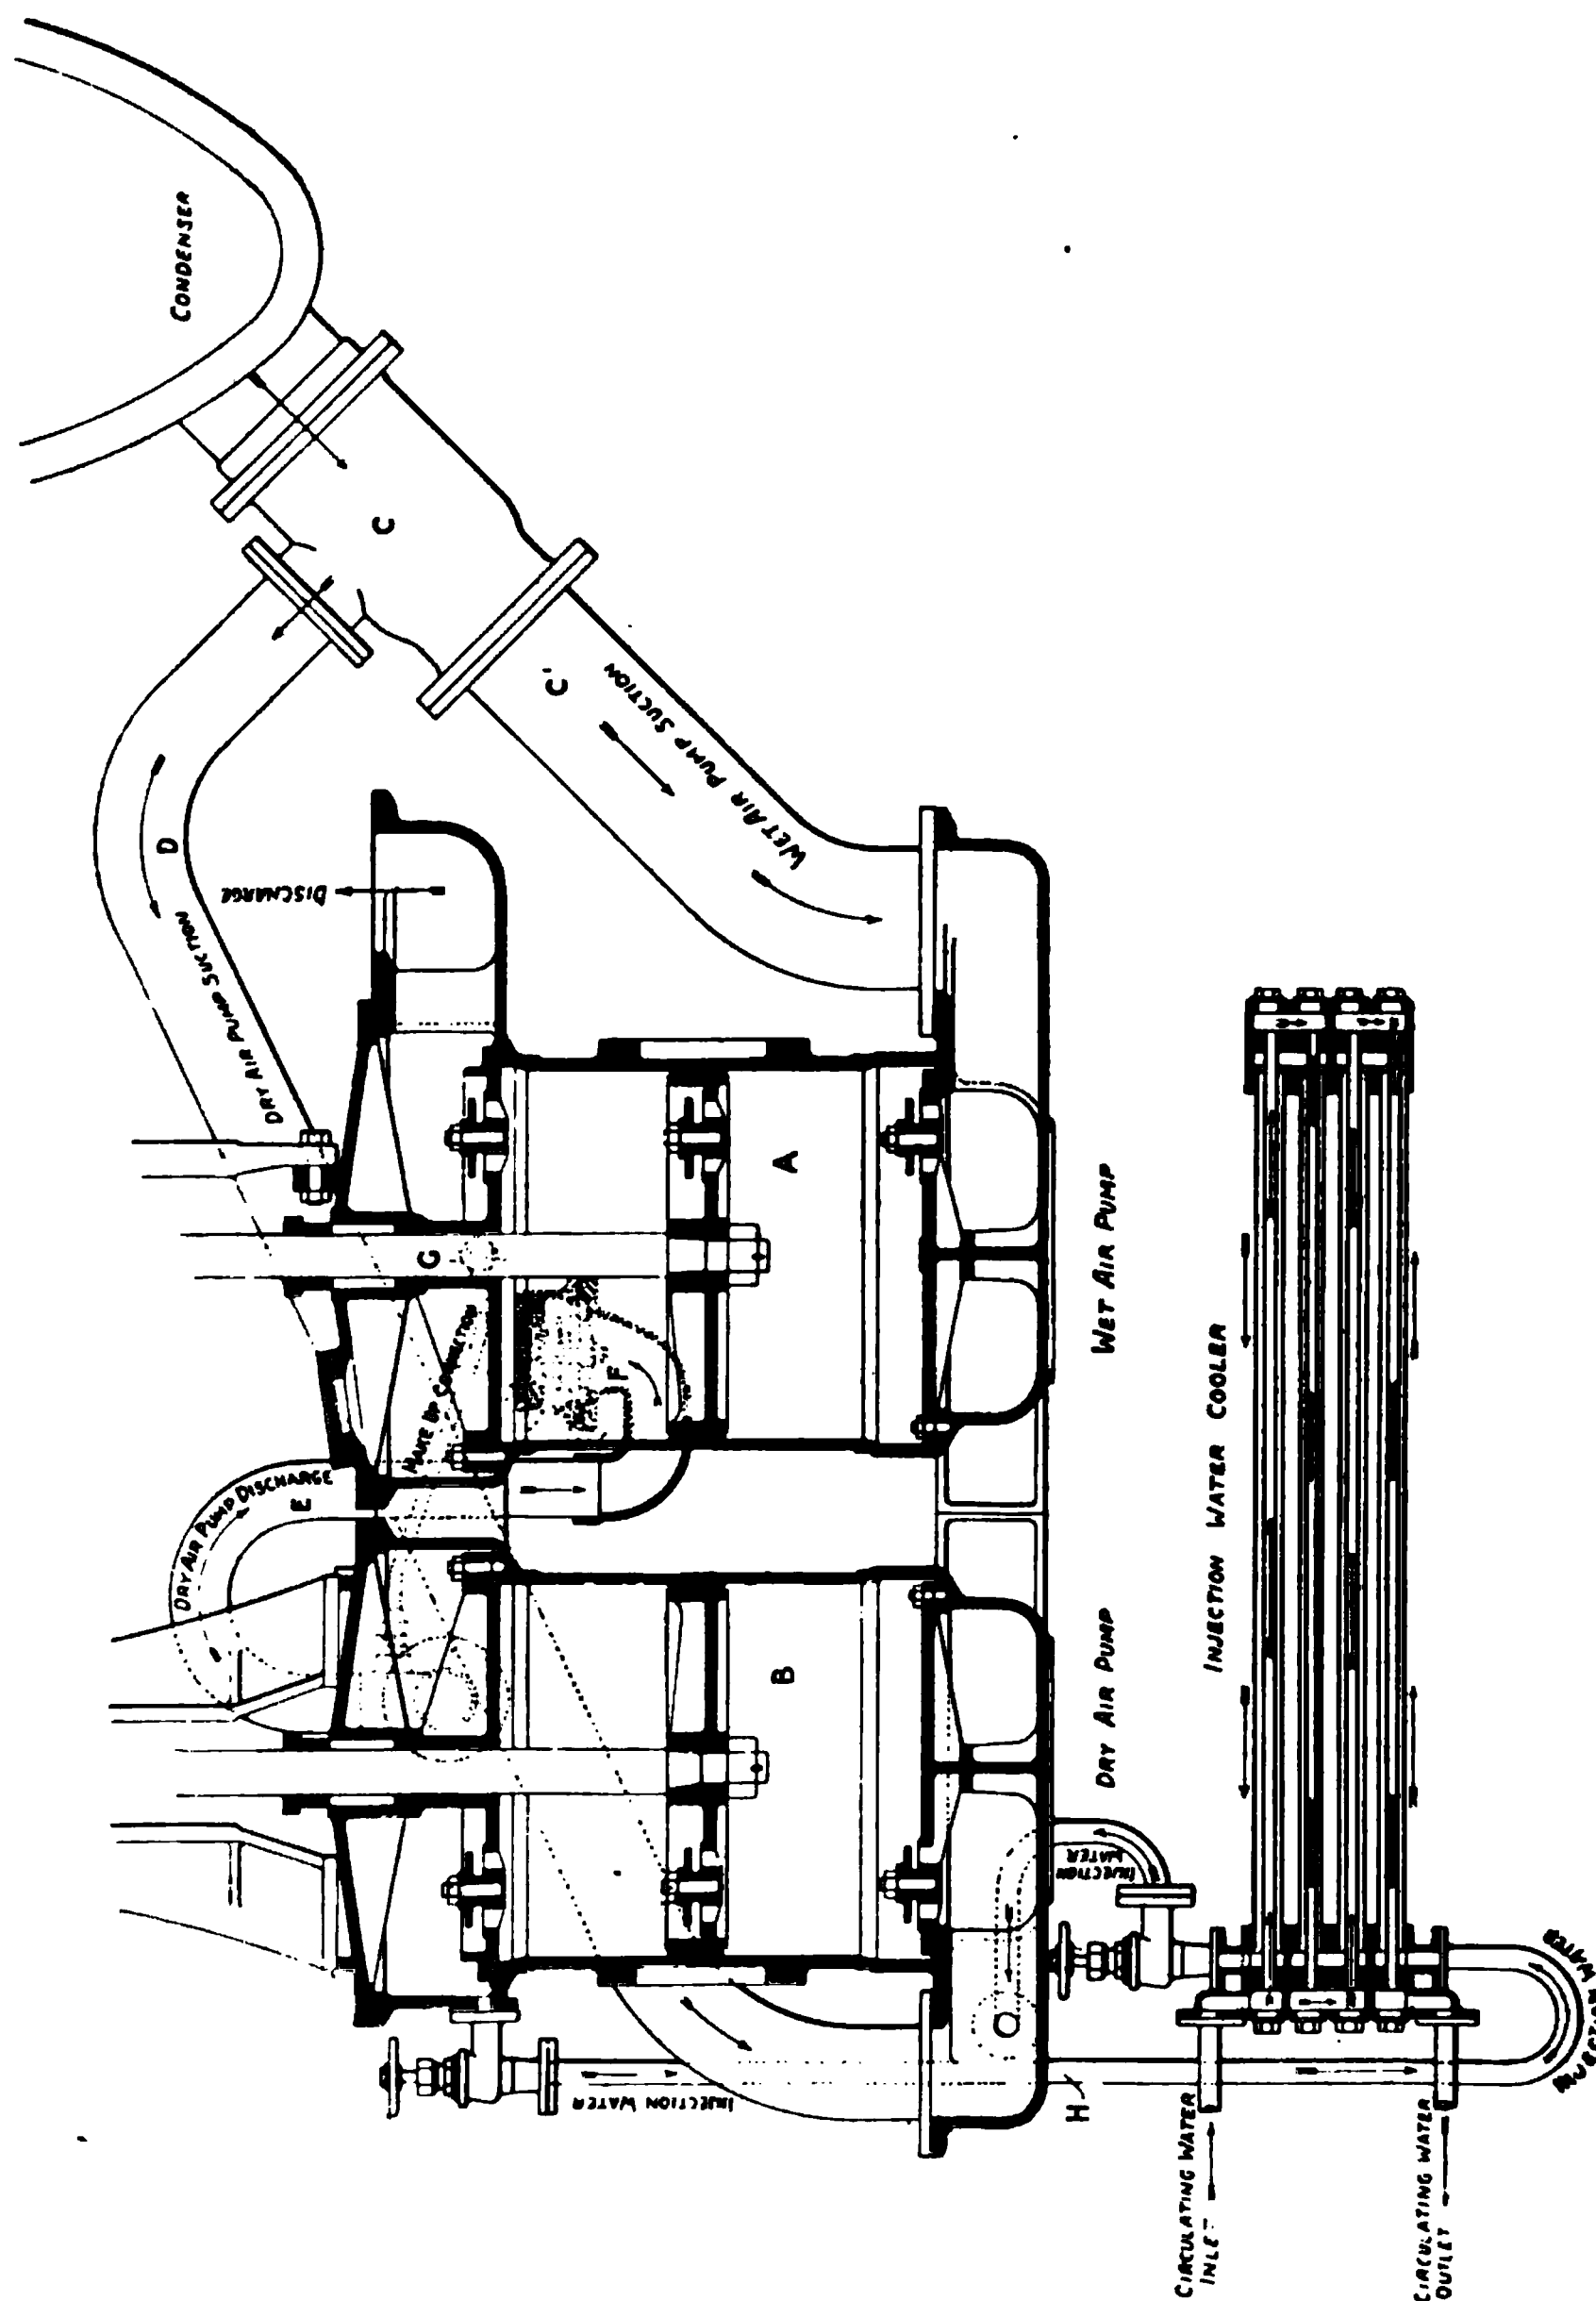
Sectional Arrangement of the "Weir" Dual Air Pump, showing Cooler and Condenser Connections.
